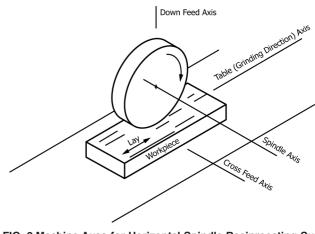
Machine Axes for Horizontal Spindle Reciprocating Surface Grinder
